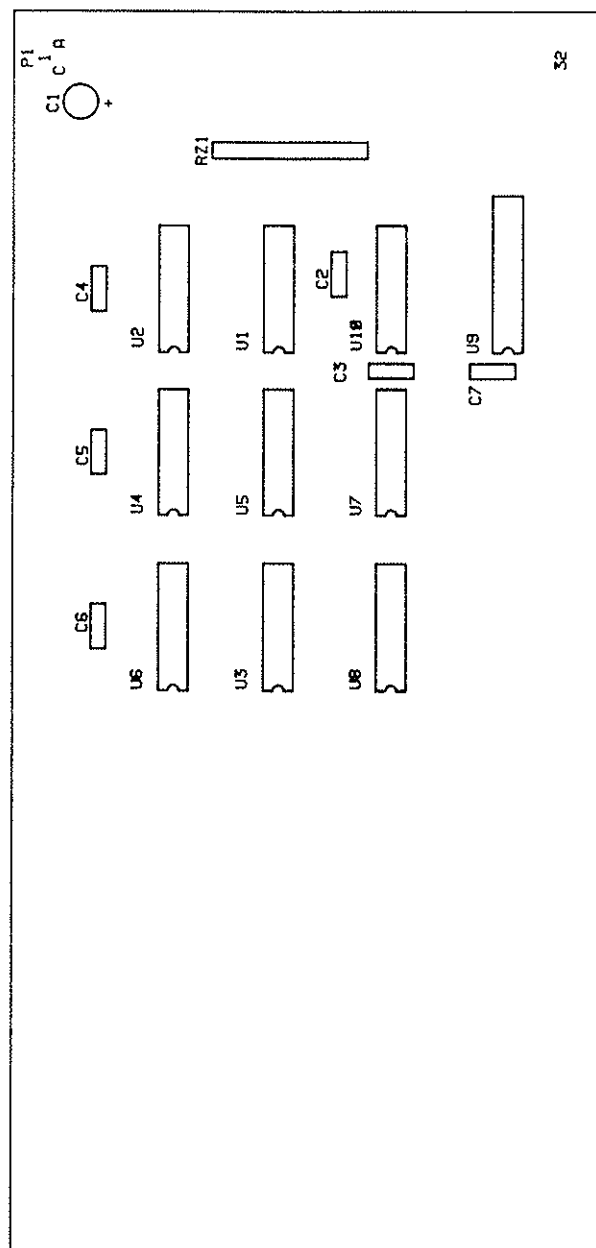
Component locator drawing, RFL 97 TRIP BUFFER Trip Buffer Module
